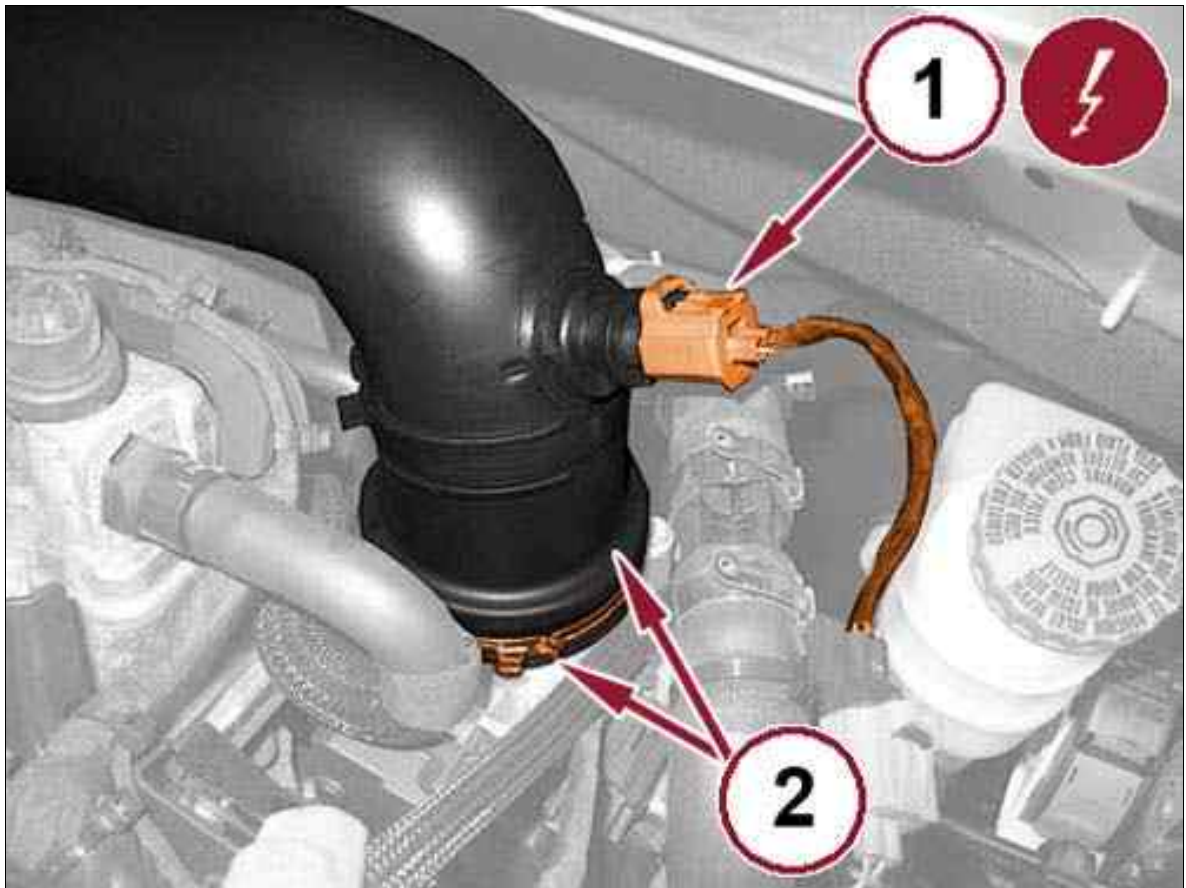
Engine Oil Vapor Hose Quick Coupling, Clean Air Hose, Clamp & Bolt
